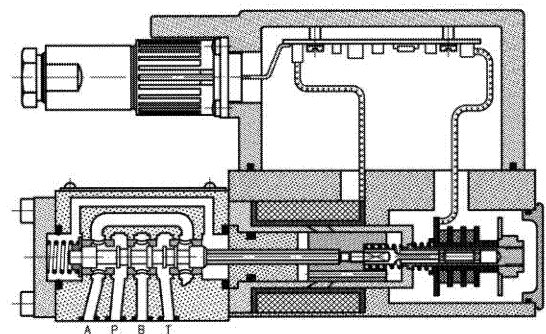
High speed industrial solenoid servo valve (BOSCH 4WRPEH 6)
